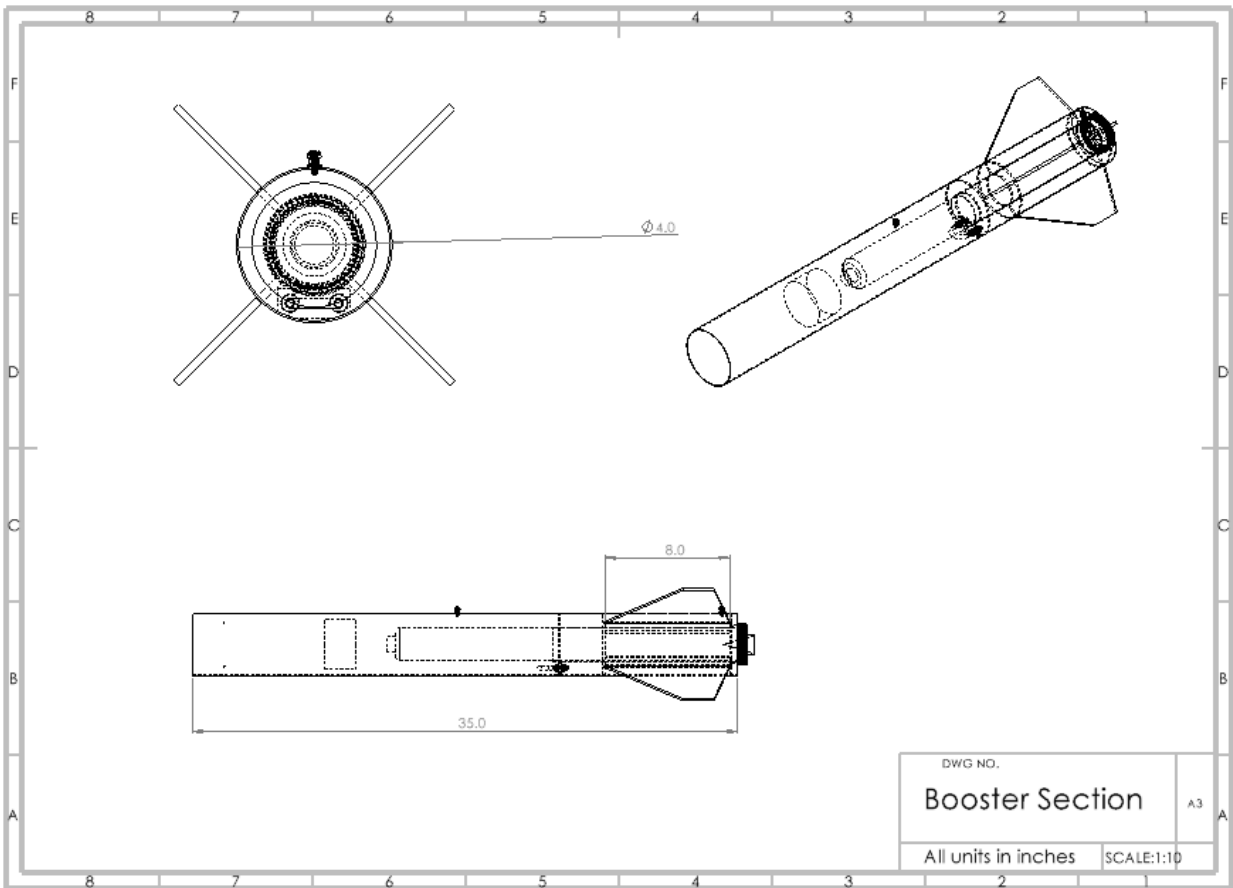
Booster Section Assembly Dimensional Drawing part 1
